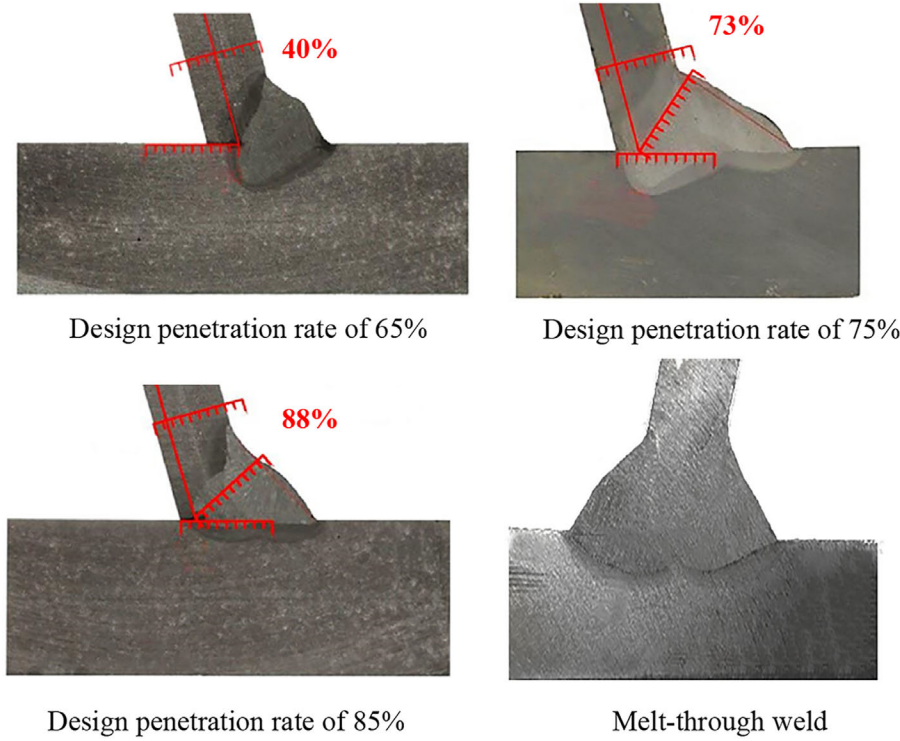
Appearance of rib-to-deck welded joint. Source(s): Authors' own work
